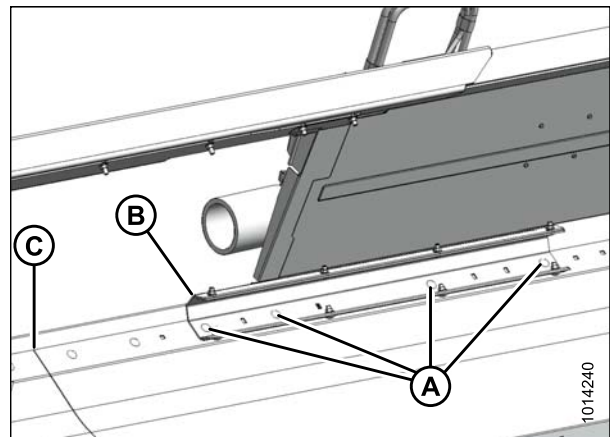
Left Stripper – Narrow Opening (Auger Not Shown for Clarity)
